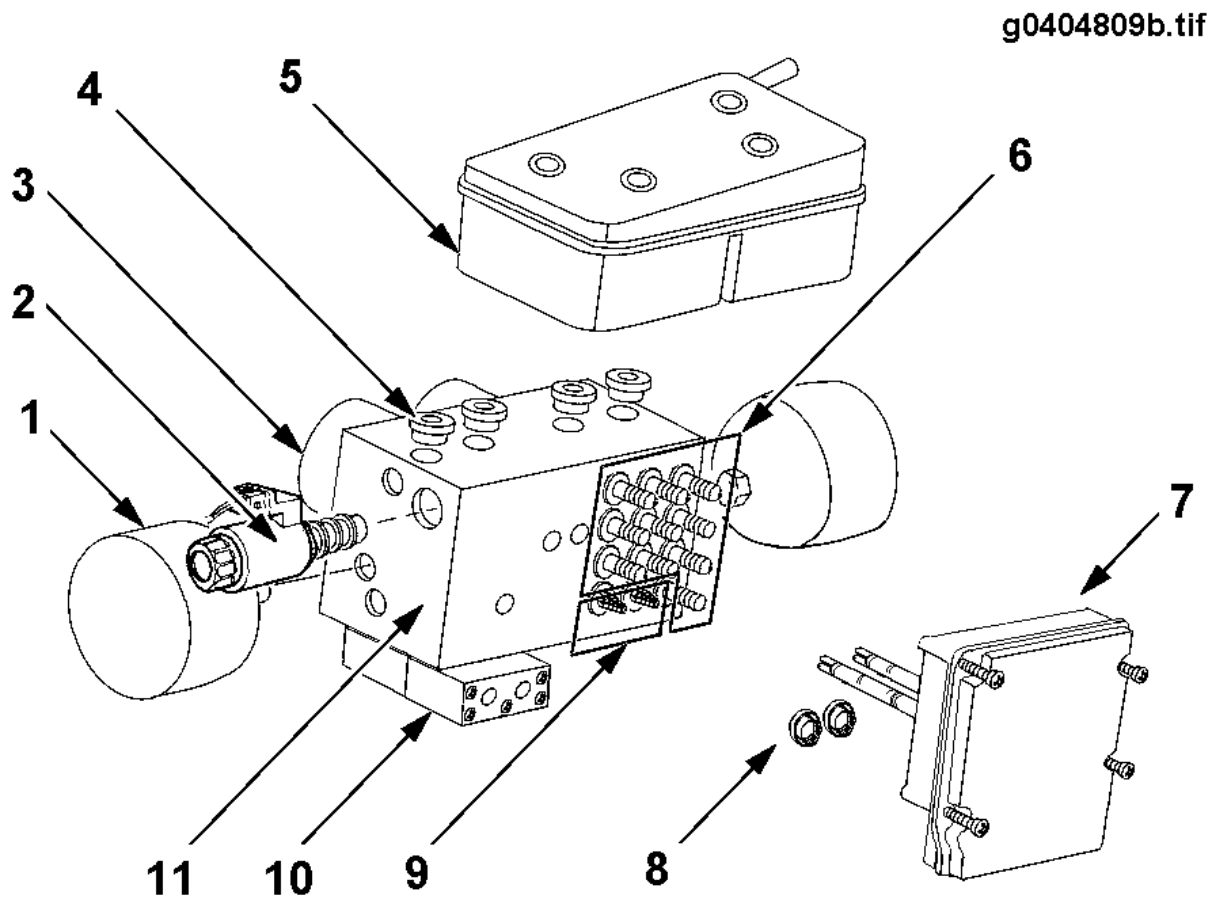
Hydraulic Compact Unit Mounted to Left Frame Rail
